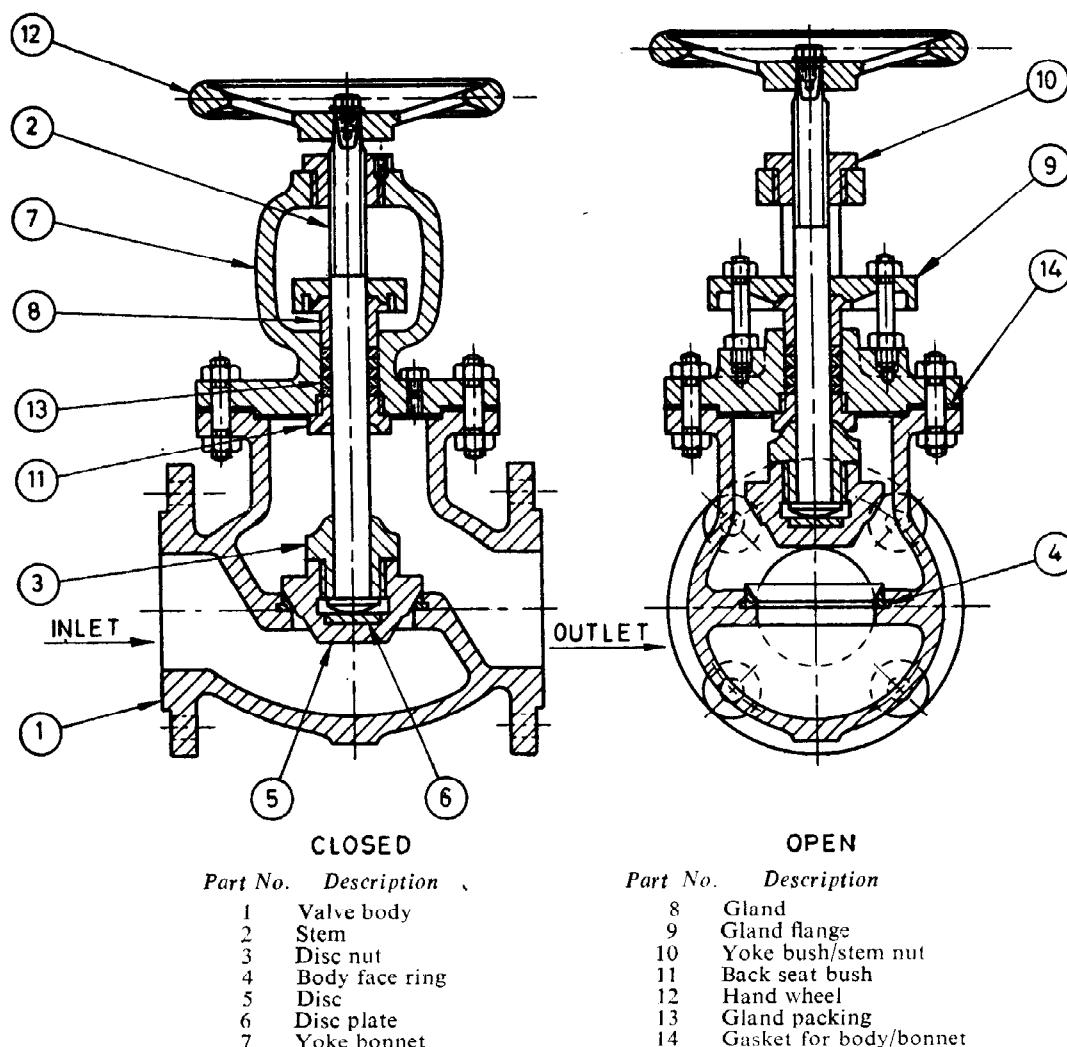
GLOBE VALVE PLUG TYPE DISC
